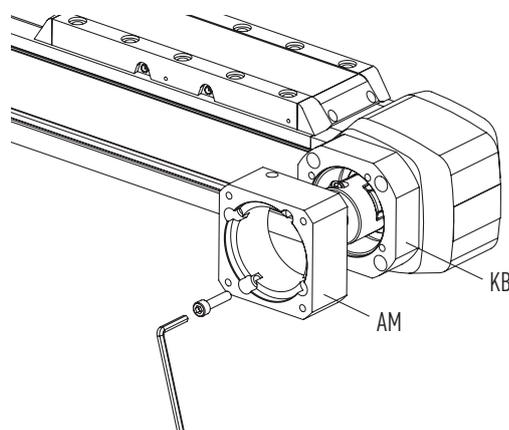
Mounting the motor adapter plate AM (HM-B)
